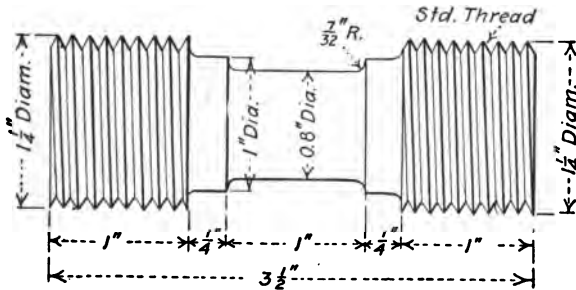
STANDARD FORM OF TEST SPECIMEN REQUIRED FOR TENSION TESTS OF GRAY-IRON CASTING MATERIAL
